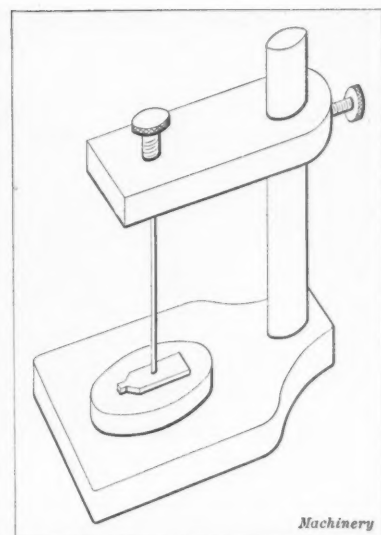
Die Clamp used for holding Templet to Blank while marking
